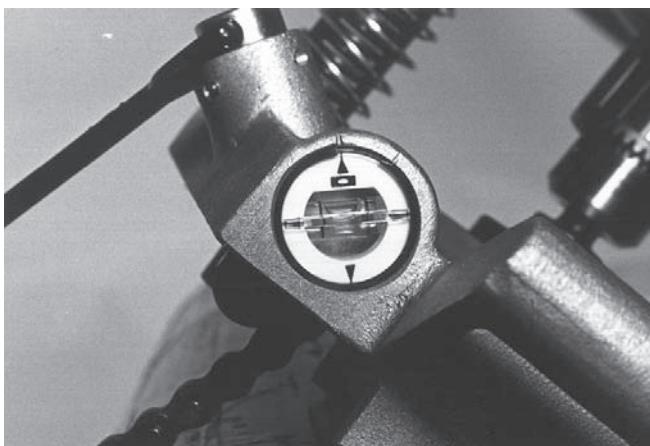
HC-450 Hole Cutting Tool Level Vial
